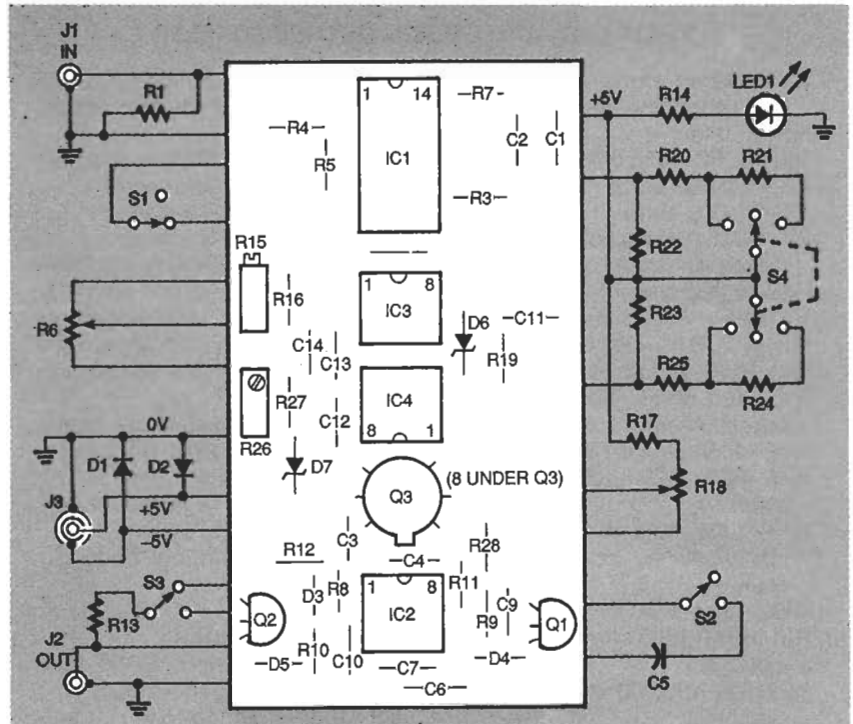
PARTS PLACEMENT DIAGRAM for the adapter showing approximate locations of components on the circuit board. Many other components are chassis mounted and wired to the circuit board.
